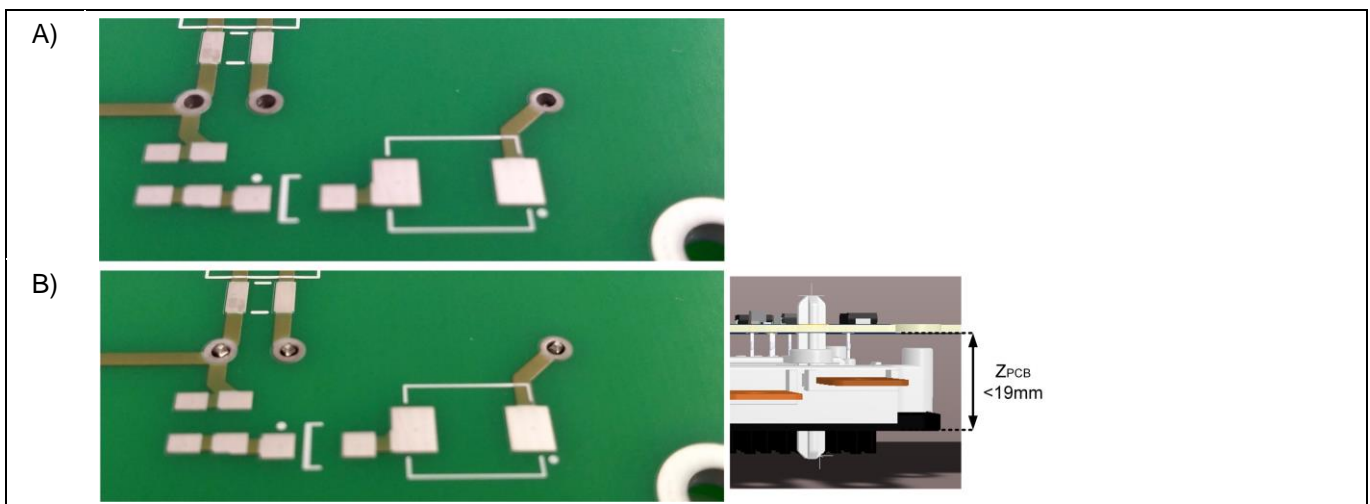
PCB at beginning of alignment process (A). After correct alignment, the pins are inserted in the PCB and are clearly visible at the PCB top side (B). The system is now ready for the press-in process.
